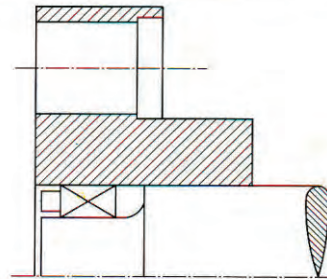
Coupling half mounted with GSN 7012 locking assembly.
